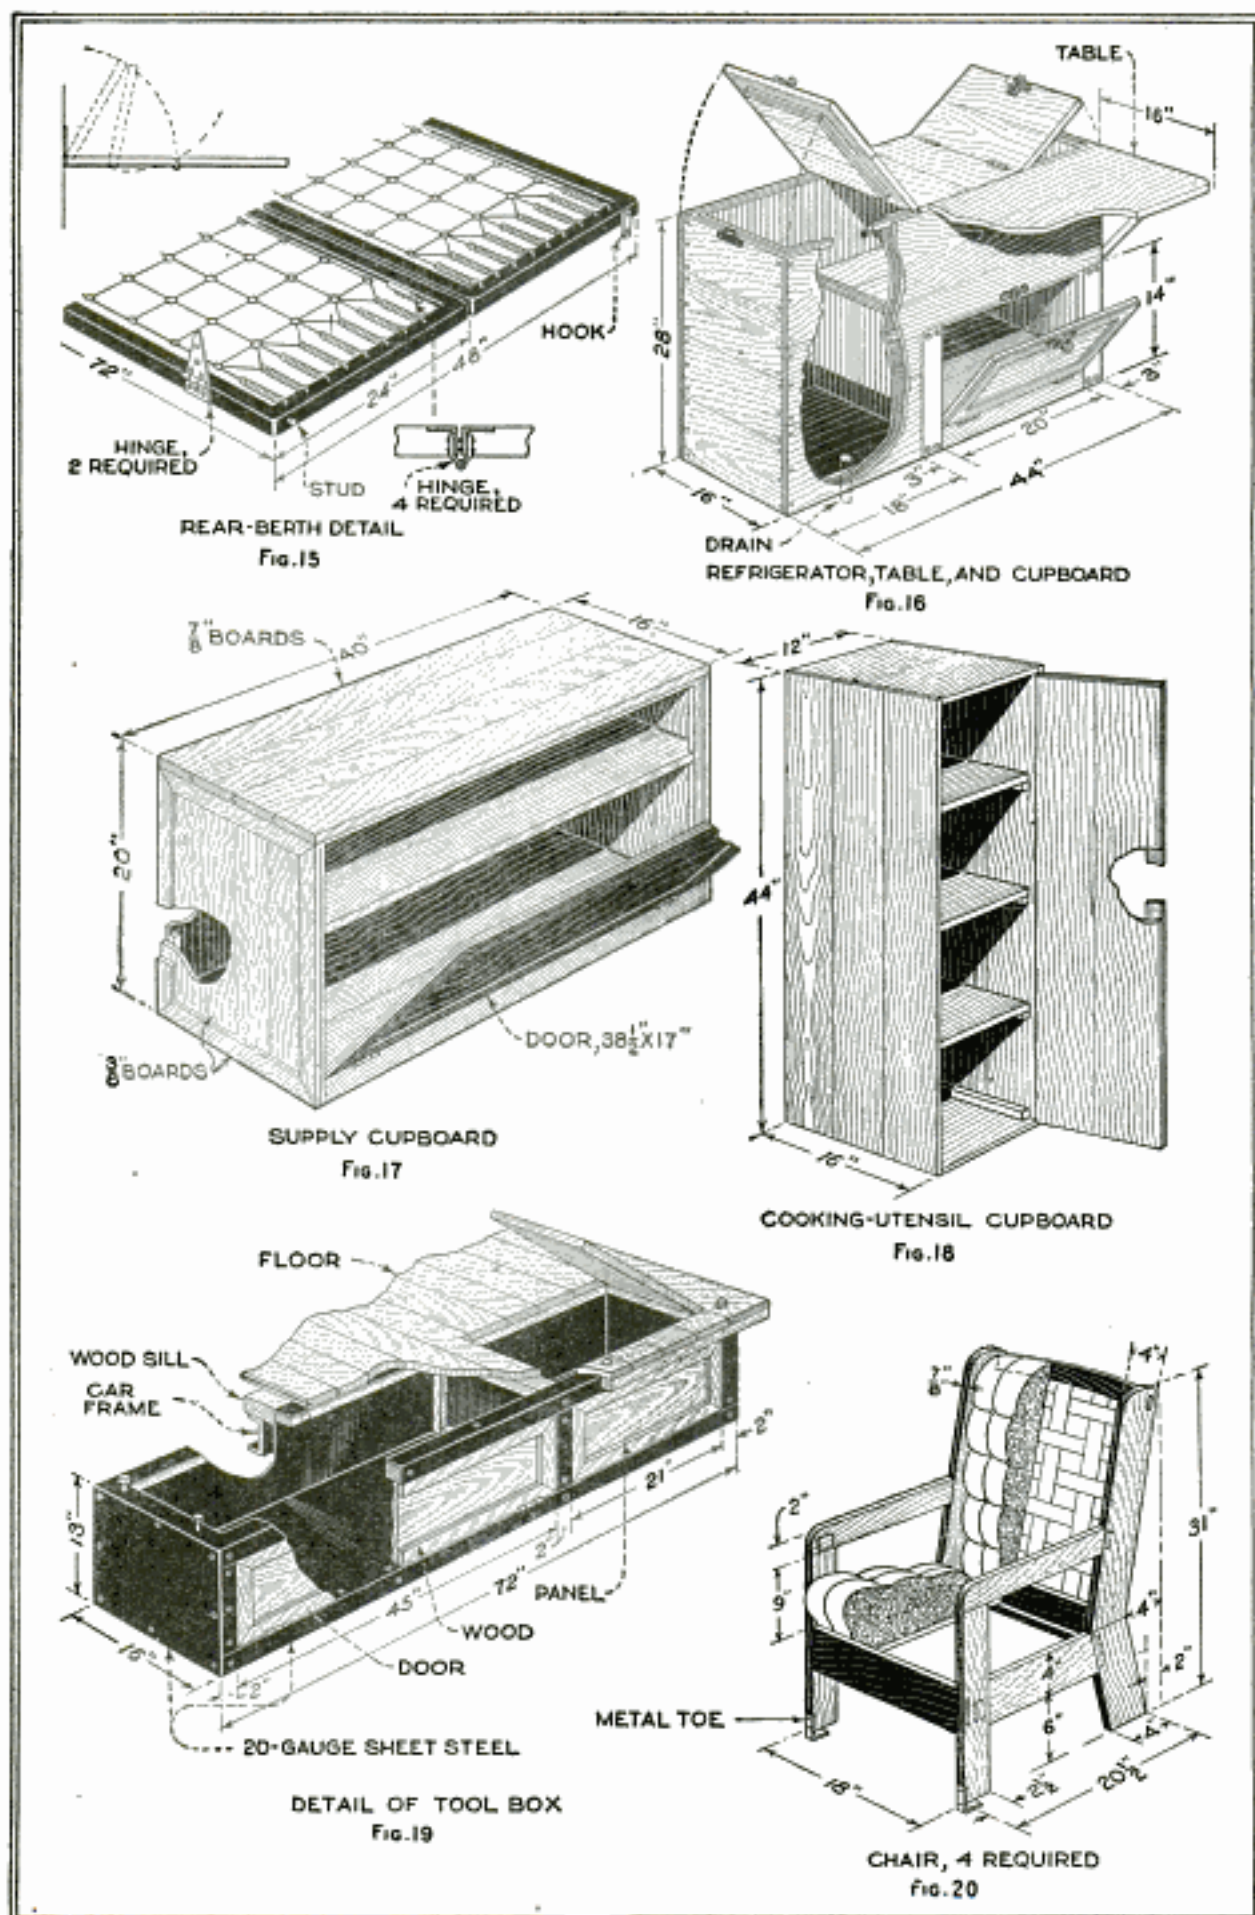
, Details of Rear Berth; Figure 16, Construction of Refrigerator and Table; Figures 17 and 18, Supply and Cooking-Utensil Cupboard Details; Figure 19, Method of Making Tool Box; Figure 20, Framing and Upholstering of Chair, Showing Method of Fastening Chair to Floor
